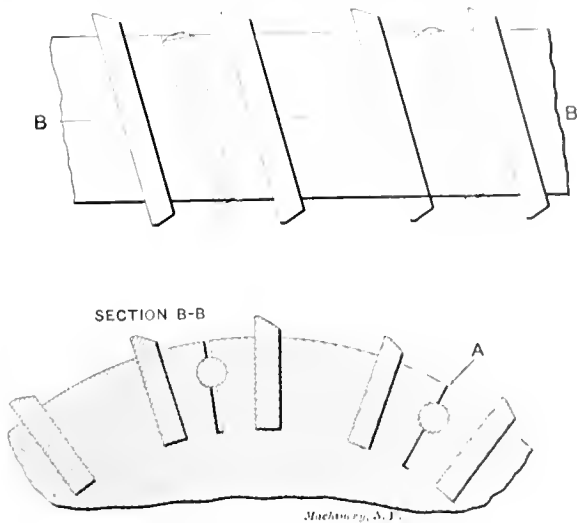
Pratt & Whitney Method of Securing Blades to Body of Axial Cutter
